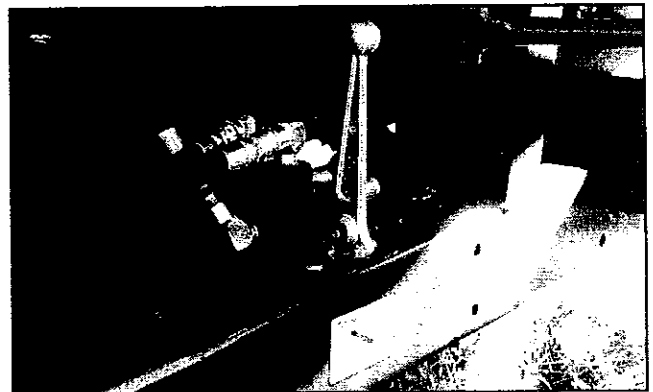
Hydraulic Selector Valve (lever in the in position - hydraulic swing).
